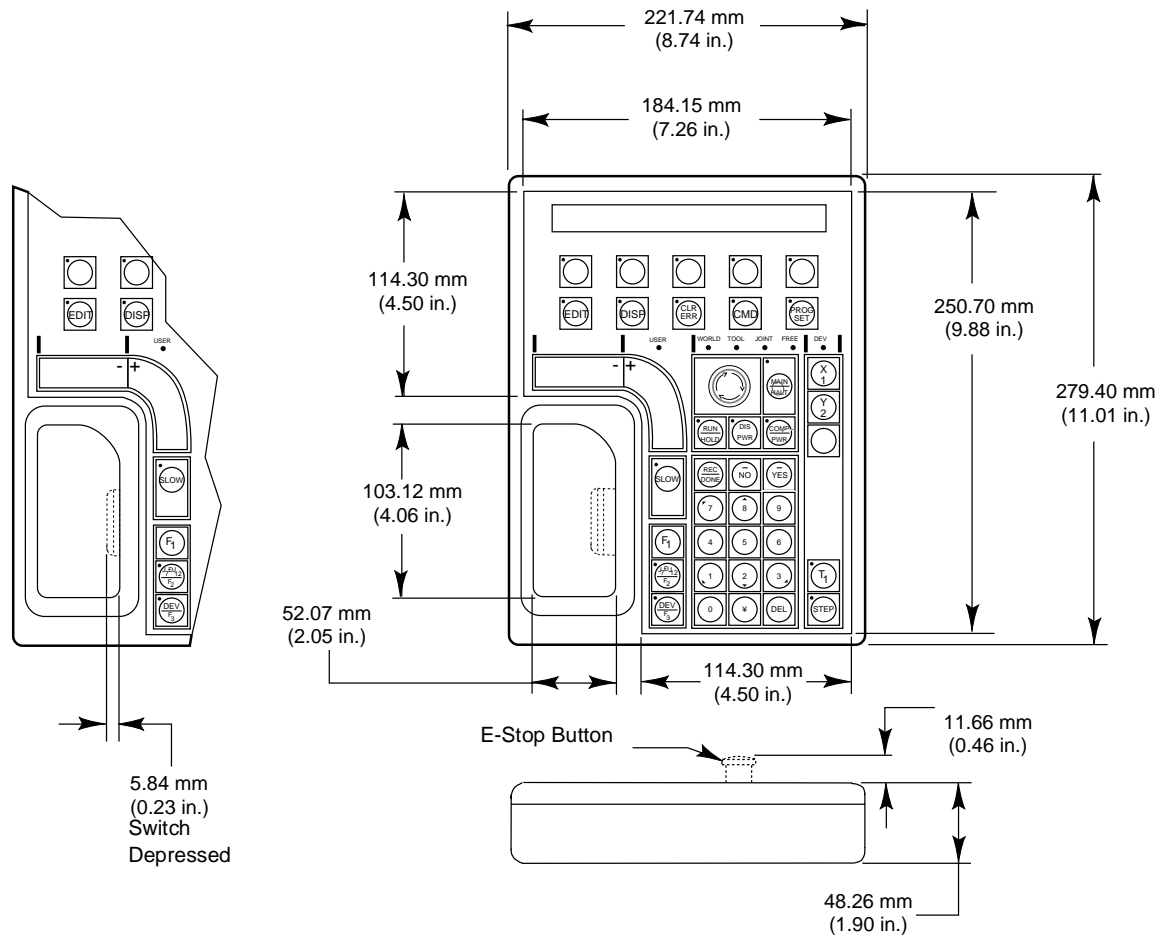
Manual Control Pendant (MCP) Dimensions
